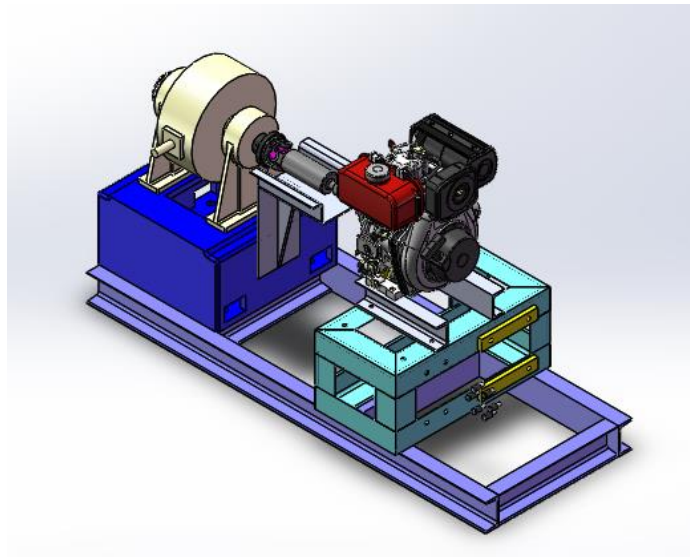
CAD model showing Engine mounted on the engine base together with dynamometer
